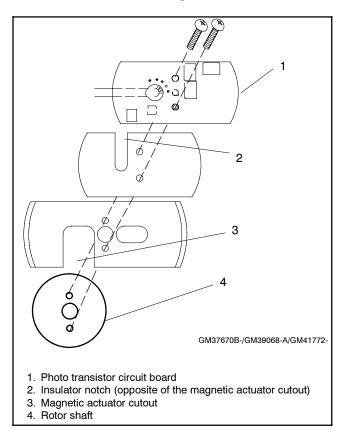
Photo Transistor Circuit Board Mounting (350/400 kW models shown)
